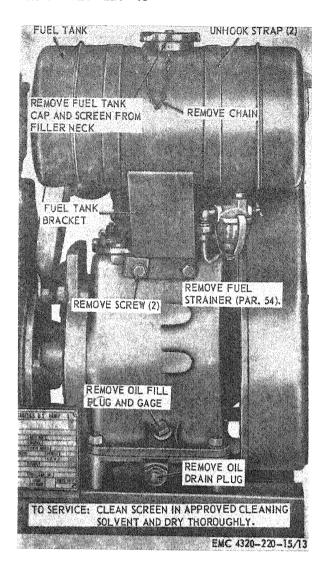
Fuel tank, cab, strainer, screen, oil fill plug and gage, and oil drain plug, removal and installation.
